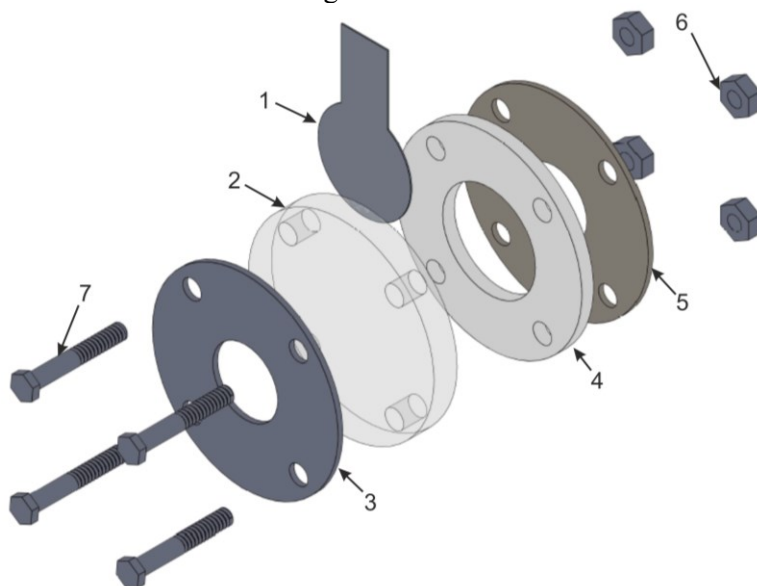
16 Detailed assembly drawing of the specimen holder for fabrication of nanoporous AAO membrane: aluminum specimen cut out (1), acrylonitrile butadiene styrene (2), bottom stainless-steel plate (3), silicon gasket (4), top stainless cover (5), M16 nuts (6), and M16 bolts (7)
